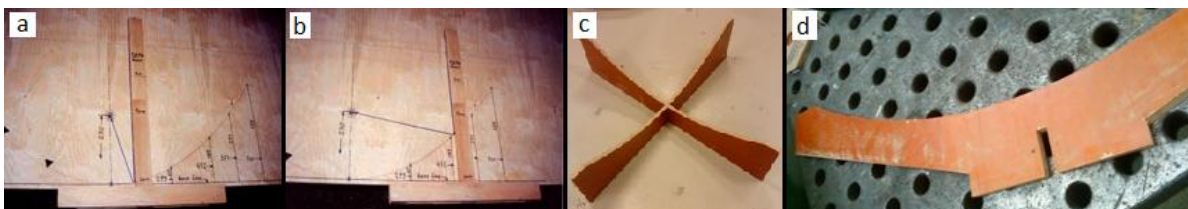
(a), (b) Drawing of parabolic line by use of a T-shaped tool [2], (c) two parabolic profiles combined together with a cogging joint, (d) Redundant weight removed
